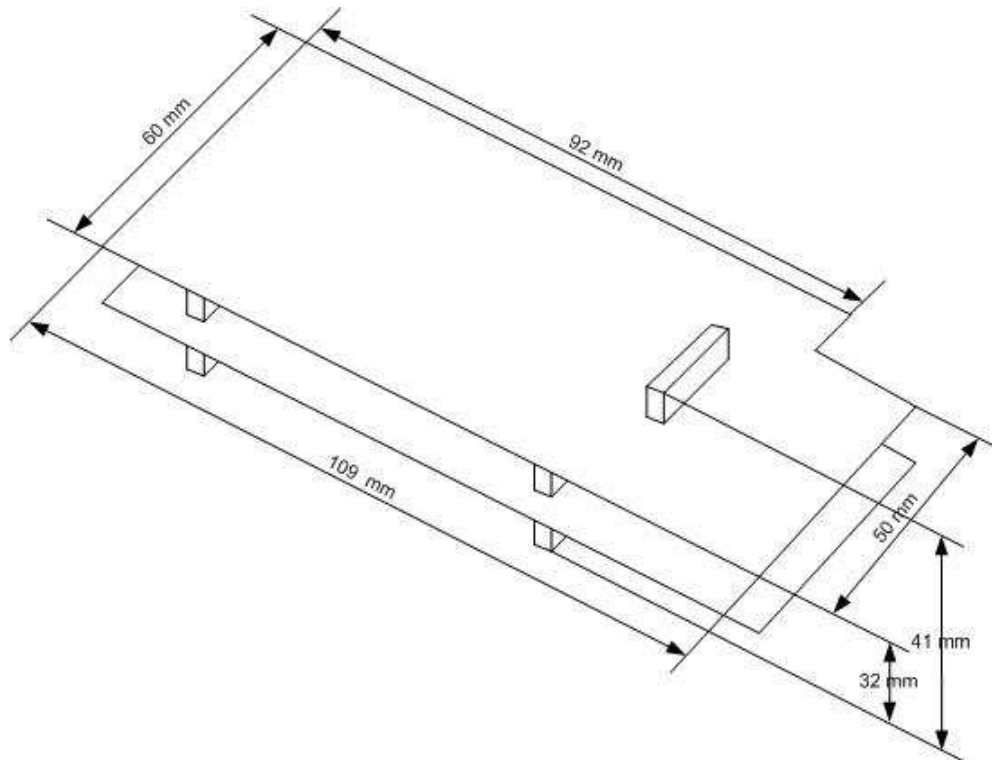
DSP add-on-boards (type Main and Extension) – board dimensions
